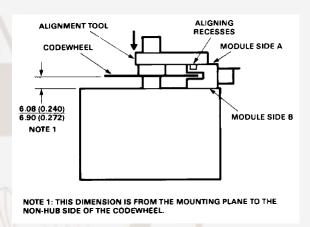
Alignment Tool is Placed over Shaft and onto Codewheel Hub. Alignment Tool Pins Mate with Aligning Recesses on Module.
